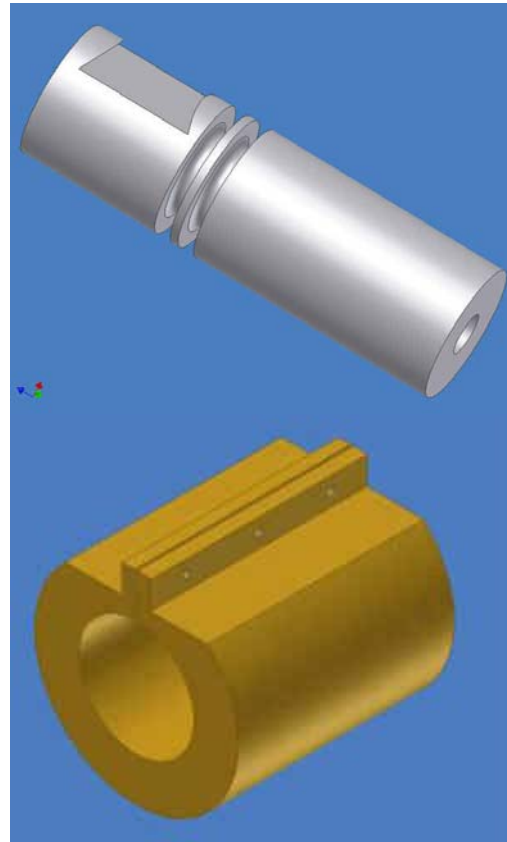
Geometry of holder and brass sleeve. The holder outer diameter is 53 mm.
